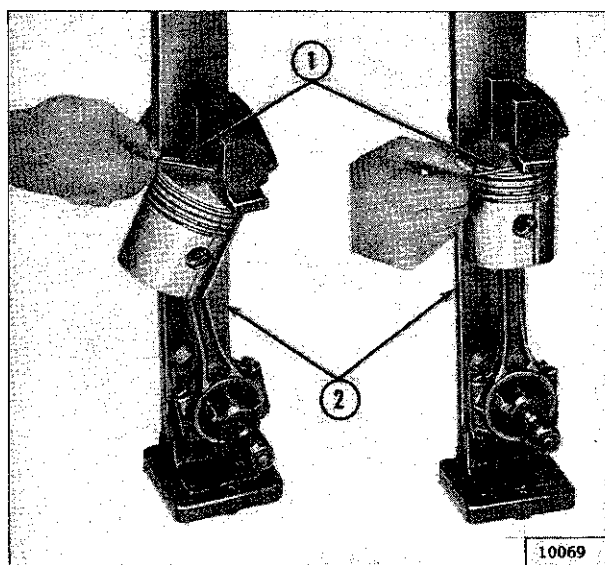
CHECKING PISTON AND CONNECTING ROD ALIGNMENT
